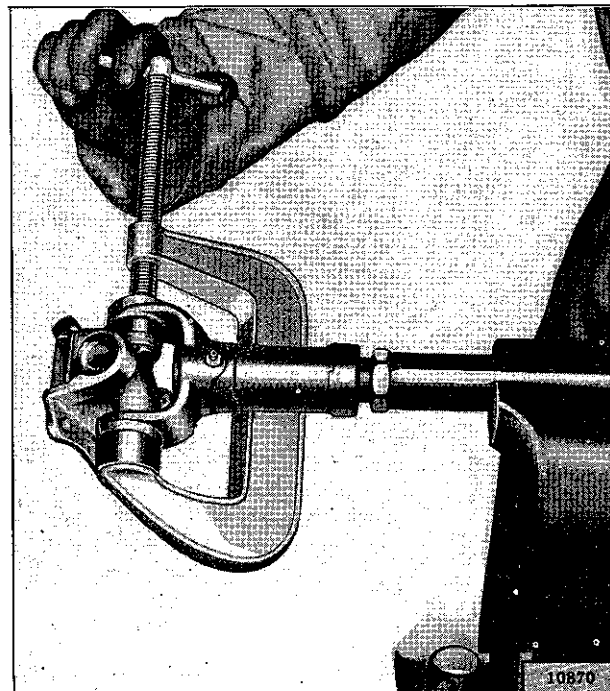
UNIVERSAL JOINT BEARING CLAMP
